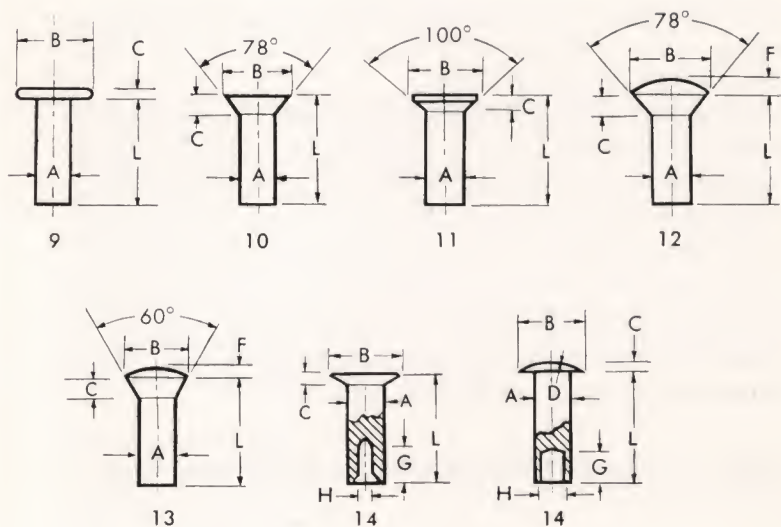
(Concluded) — Common Types of Heads Supplied on Aluminum Alloy Rivets
